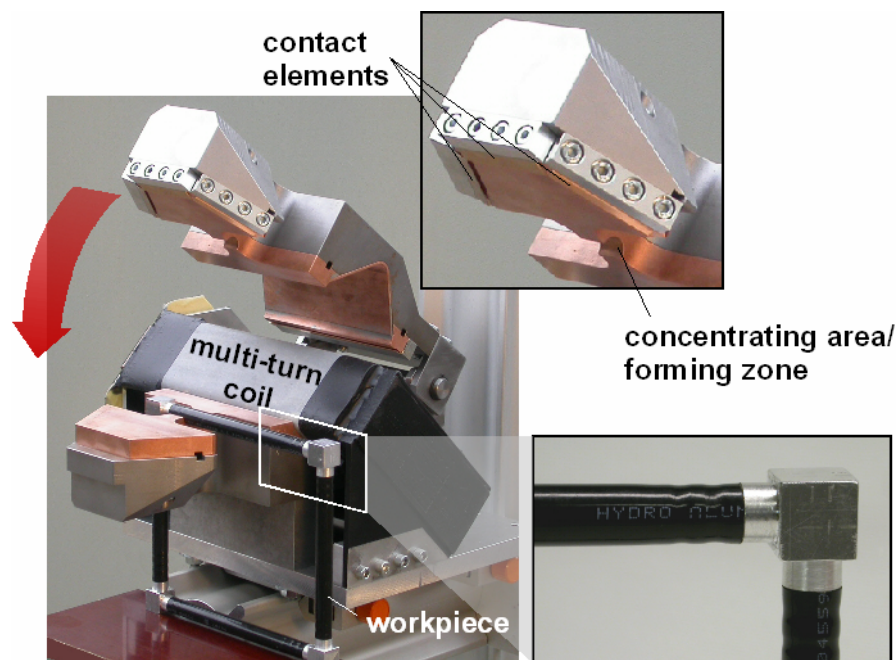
Separable compression coil with non-welding contact elements and joining example (closed frame structure)
